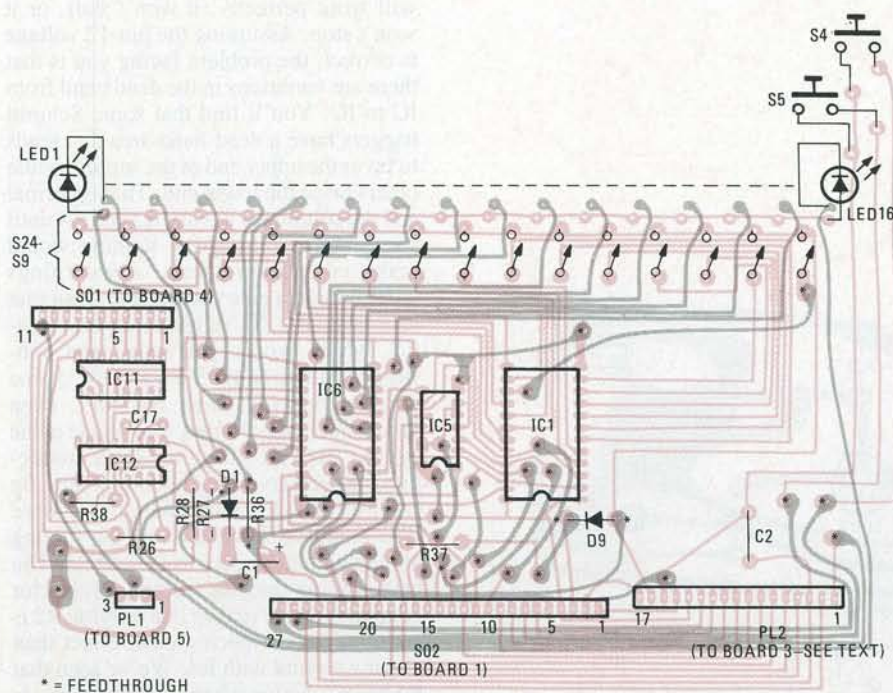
AS SHOWN HERE, the cathode connections for LED1-LED16 are located on the foil side of Board 2.
